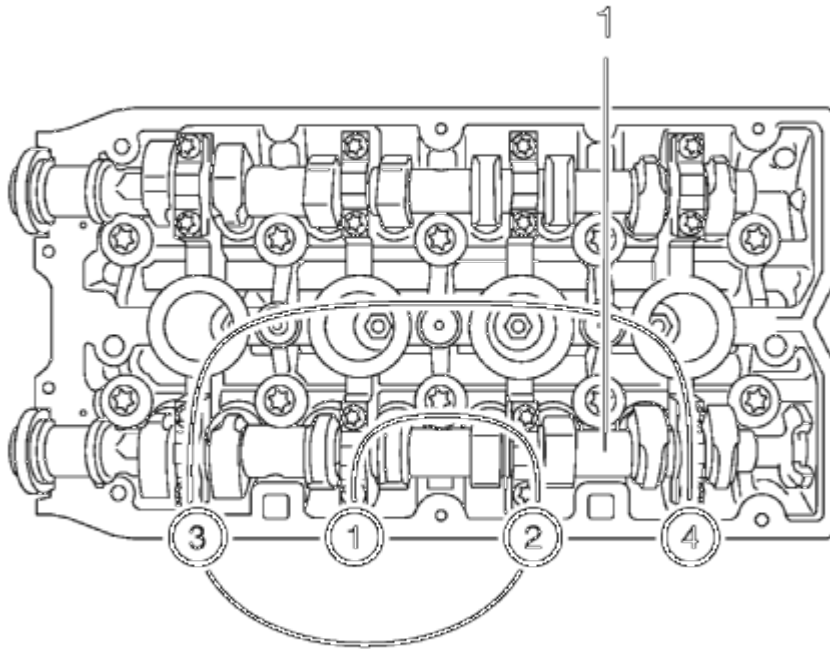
Exhaust Camshaft Bearing Cover Bolts Tightening Sequence
